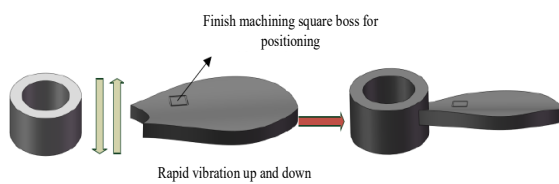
Sketch of linear friction welding of bladed disk
